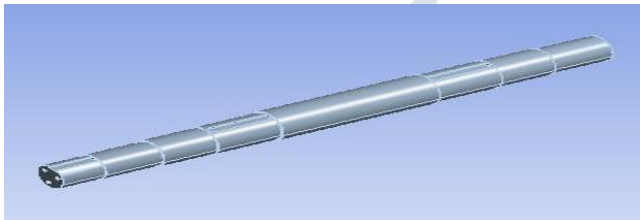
Modified Shaft Design-3 Model for above Case-7, Case-8, Case-9
